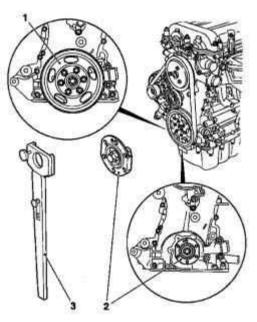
Joining the hub of the crankshaft: 1 - belt pulley of the crankshaft 2 - the hub of the crankshaft 3 - special tool
